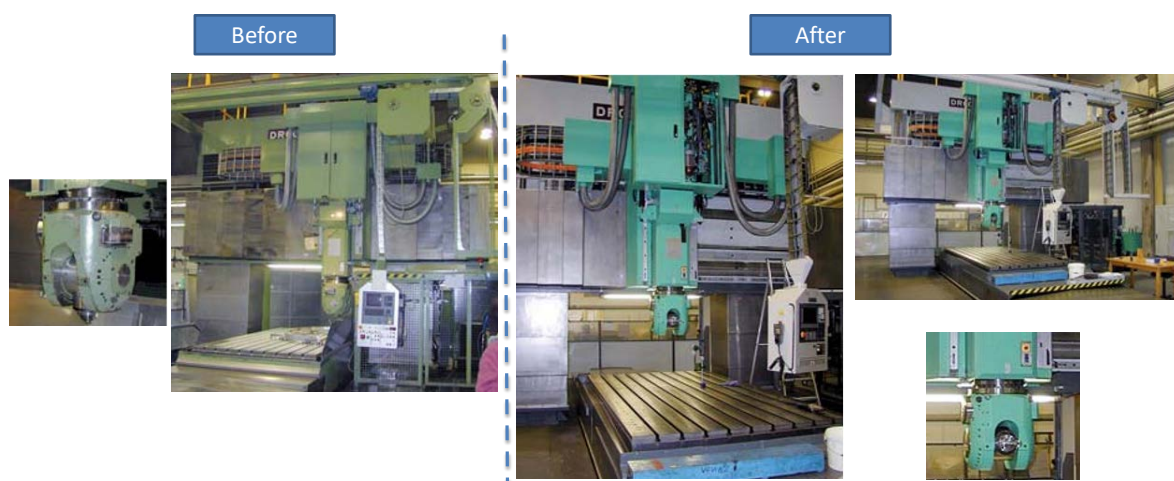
Modernization of a portal milling machine type FP 2000 SA⁸⁸
